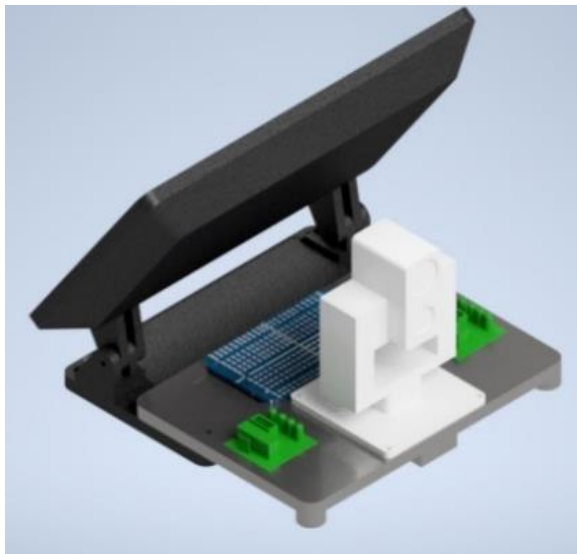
FULL SYSTEM ASSEMBLY INCLUDING TOUCH SCREEN, LIDAR HOUSING, AND SYSTEM COMPONENTS ON MOUNTING PLATE
